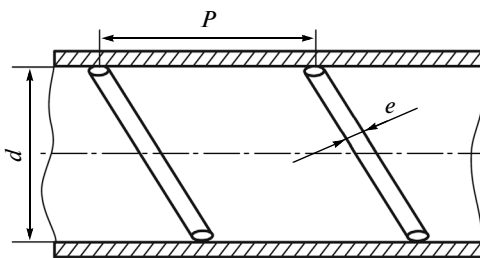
Sketch of a helical coiled wire fitted inside a smooth tube.
